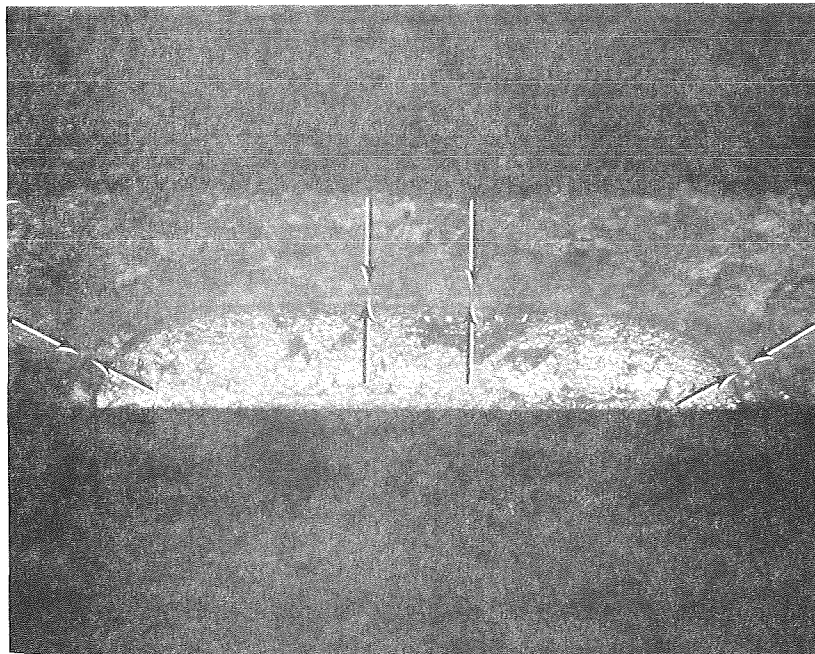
Fracture Face of Specimen Showing Slight Uniform Flaw Growth (specimen 9W9-1; 0.090-inch; water)
